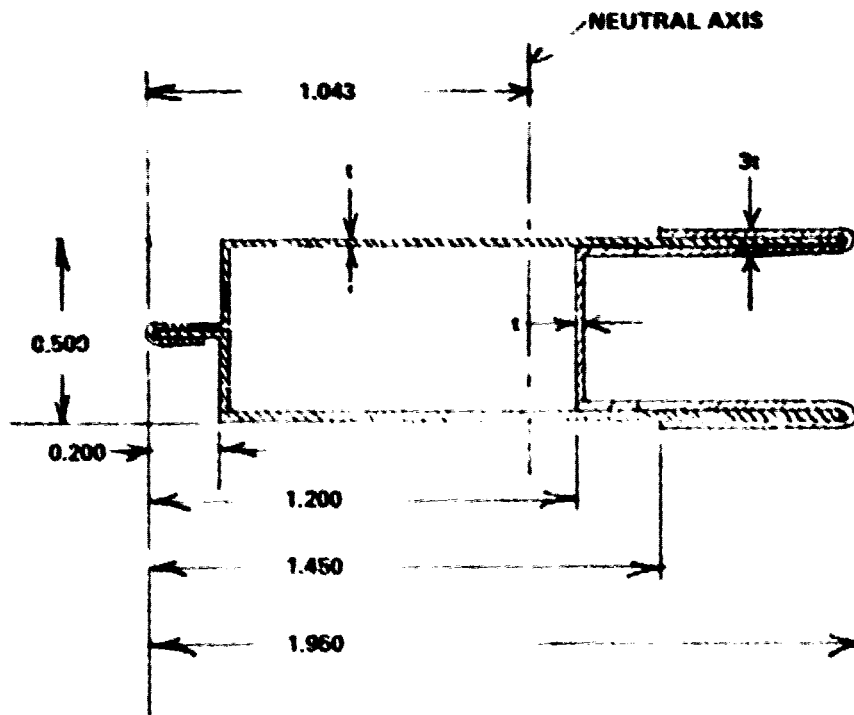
Proposed design of the shield for the foreplane assembly. Design consists of three parts. The parts are continuously assembled to each other by rolling over flanges left on top and side pieces, after the parts flow around and enclose the core of the foreplane.
